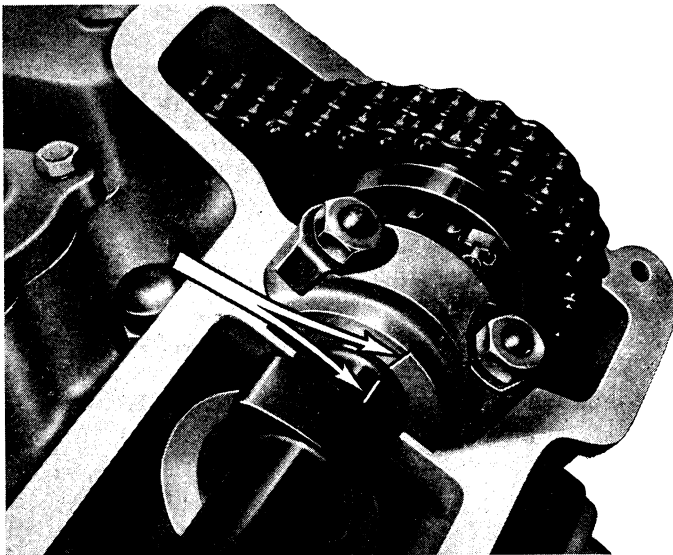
Timing marks on camshaft and bearing - engine 118 B.000.
